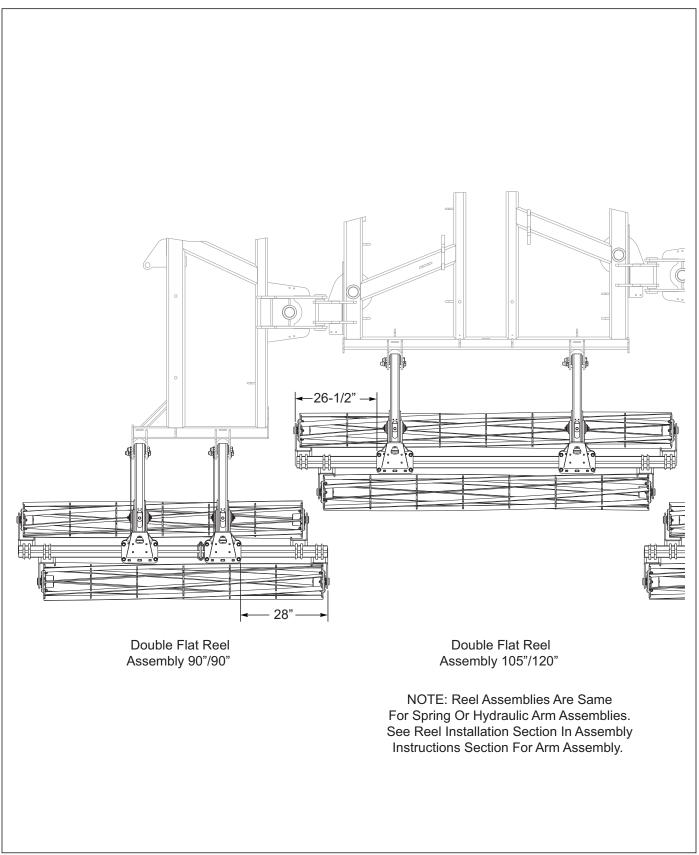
Double Flat/RD Reel Placement 7531-23' (LH)
